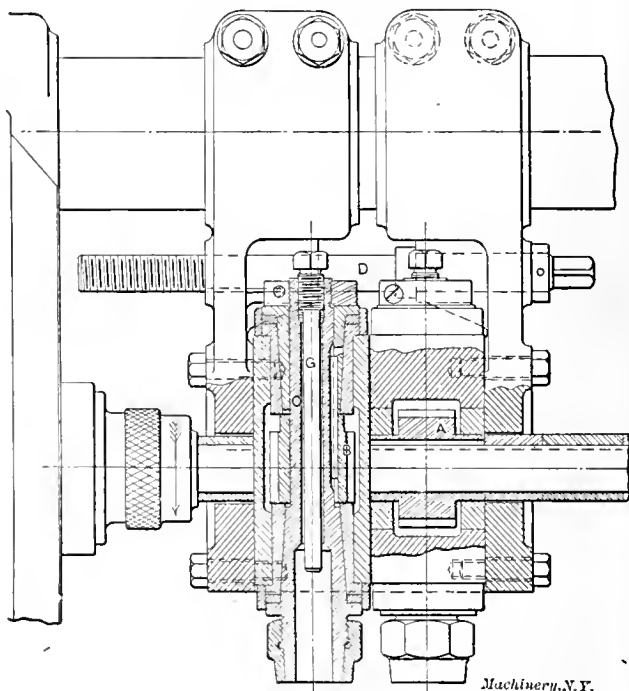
Design of Vertical Double Spindle Milling Attachment.
